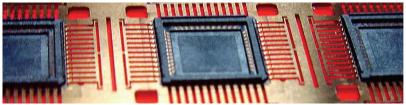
Pre-molded Thermoplastic Packages (courtesy RJR Polymers)
